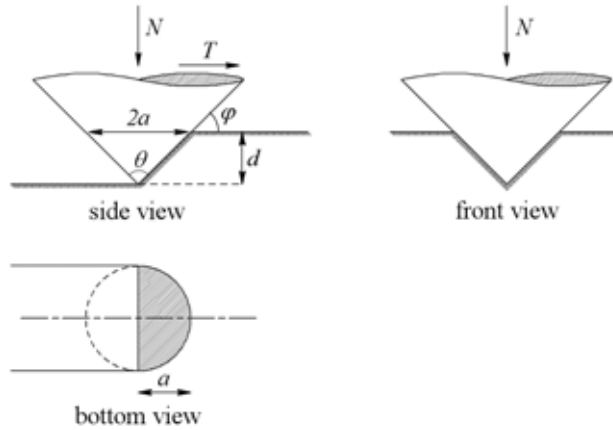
Geometry of contact between a conical abrasive and a smooth deforming flat.
